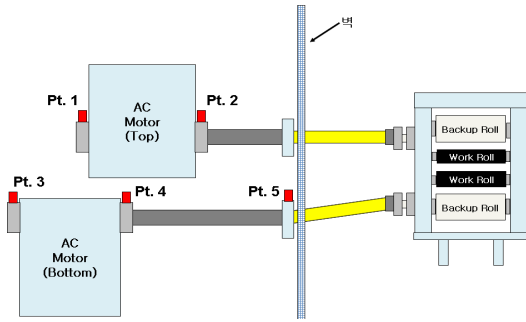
The position of accelerometer in hot rolling machine(Pt.1~Pt.5)
